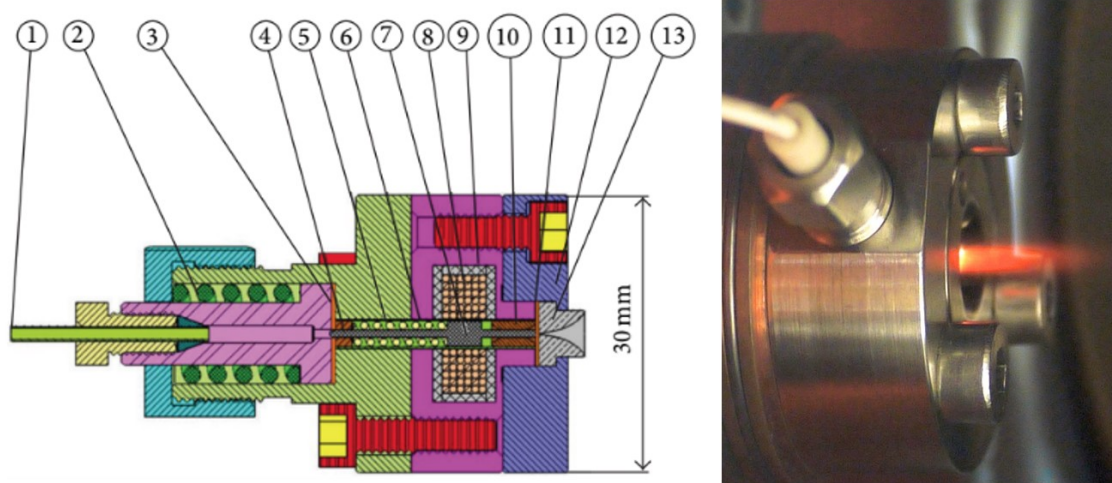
Left panel: (1) stainless gas inlet tube (1/16") gas feed; (2) tightening spring (180 N) and pressure relief valve; (3) Kapton foil gasket seals; (4) ceramic (Zirconia or Ruby) rear guiding precision ferrule; (5) return spring (stainless alloy); (6) thin walled pressure vessel (Inconel or Zirconia ceramic); (7) reciprocating plunger (magnetic stainless steel alloy); (8) Kapton insulated copper coil; (9) Permendur magnetic shield and field concentrator; (10) ceramic front guiding precision ferrule; (11) Kapton foil gasket seal (front, 0.125 mm. thick); (12) front flange and valve body (copper or stainless); (13) conical (or parabolic) shape expansion nozzle (Zirconia ceramic or hardened stainless steel). Right panel: Photo of DBD-equipped EL Valve with visible discharge. Images and description courtesy of Prof. Uzi Even and Nachum Lavie [66].
